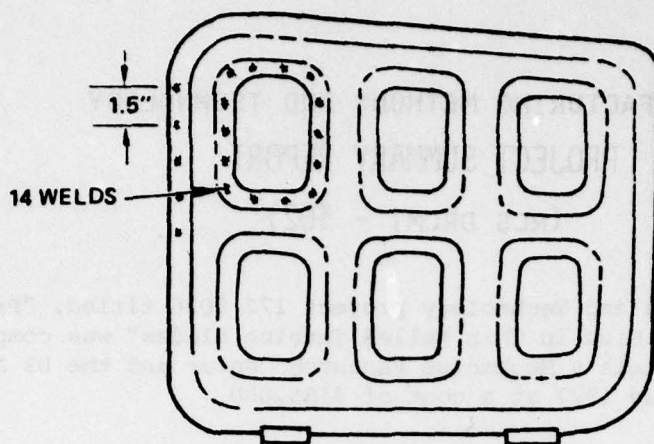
Port side electronic access door showing ultrasonic weld spacing.
